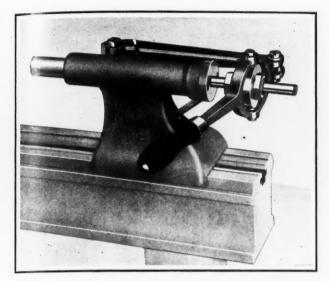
Tailstock equipped with a Lever Attachment for the Spindle
